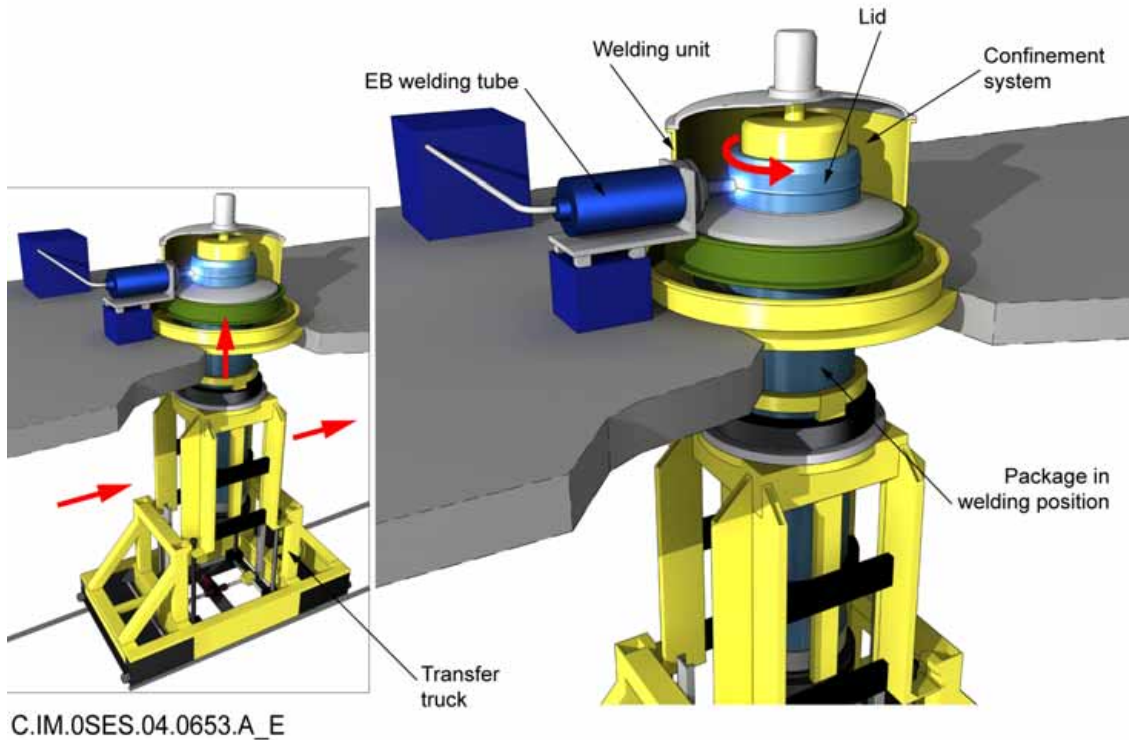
Lid welding station for a spent fuel package
